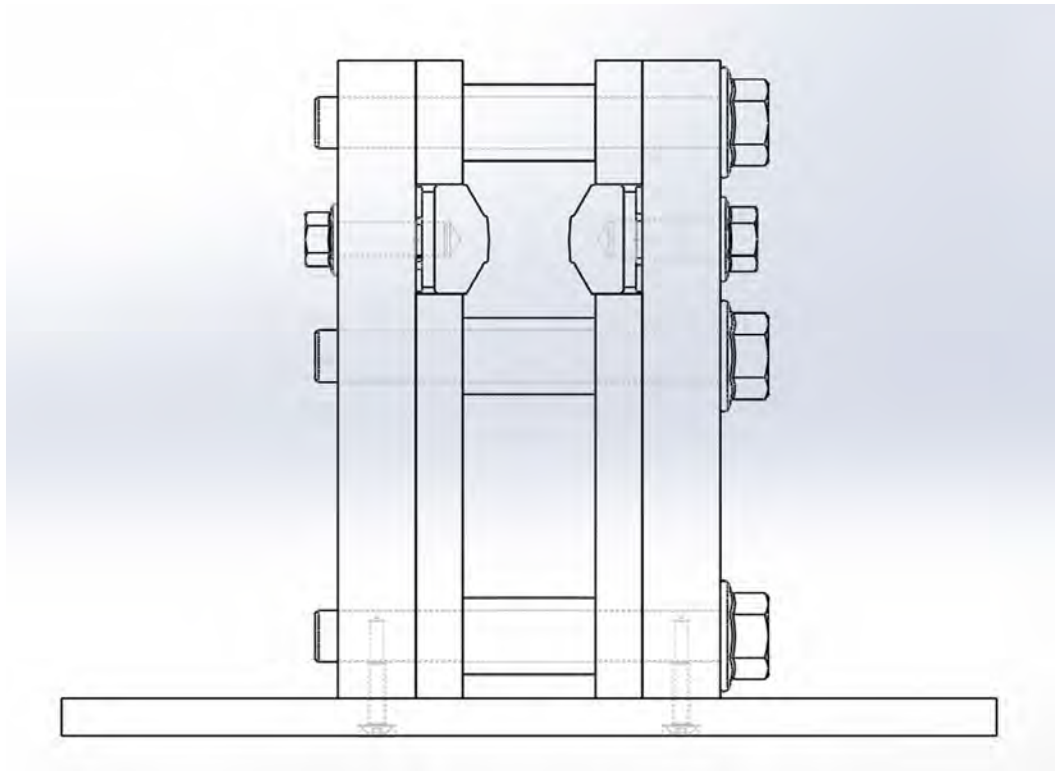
Figure showing a translucent side-view of the final rig design in order to demonstrate bolt and fixture locations
